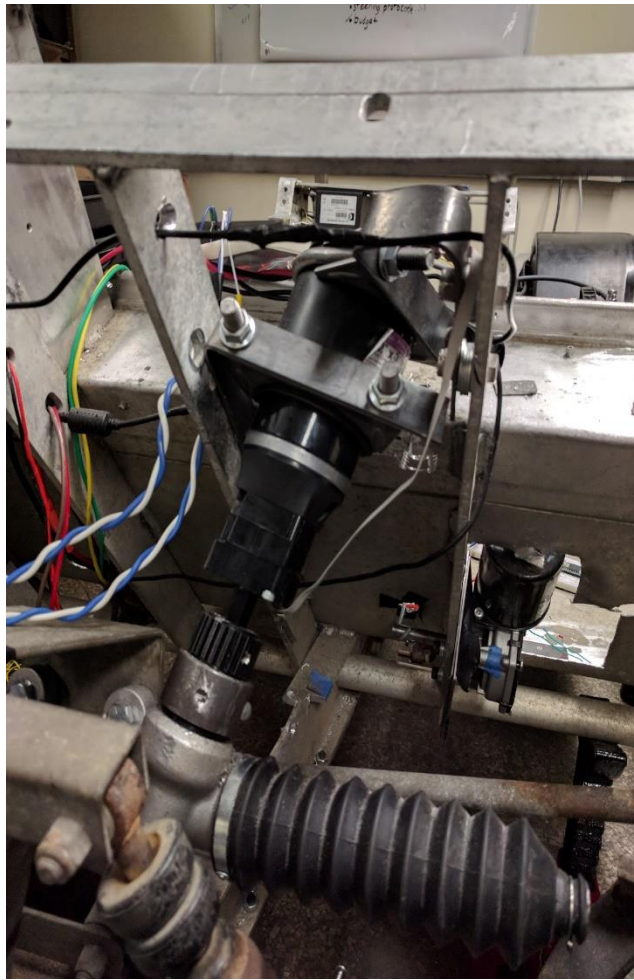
Shaft that Should be Cut to Accommodate a Two Stage Gearbox
